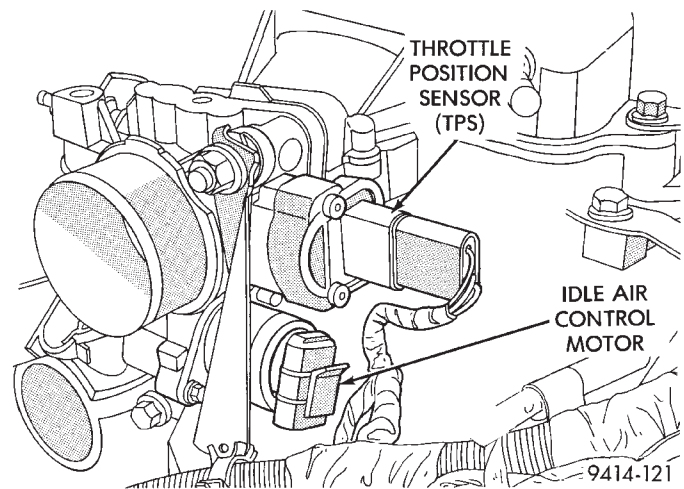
Throttle Body Electrical and Vacuum Connections—3.0L
